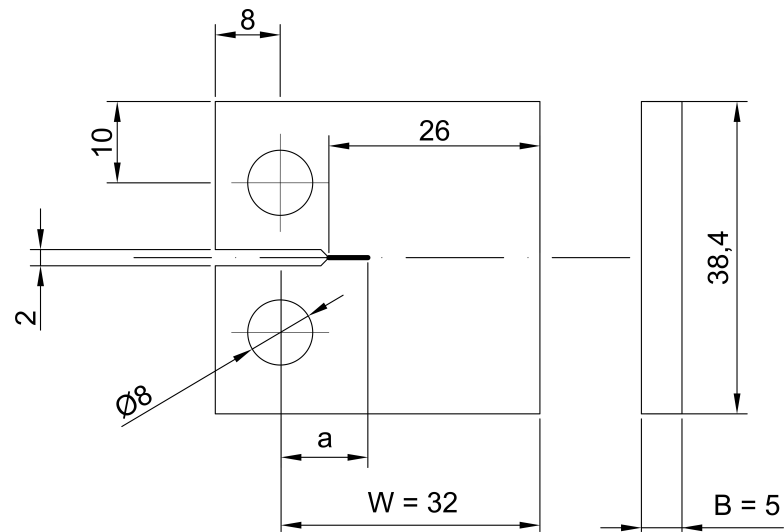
Geometry of the compact tension specimens employed in the mode I fracture tests [243]. All dimensions are expressed in [mm].
